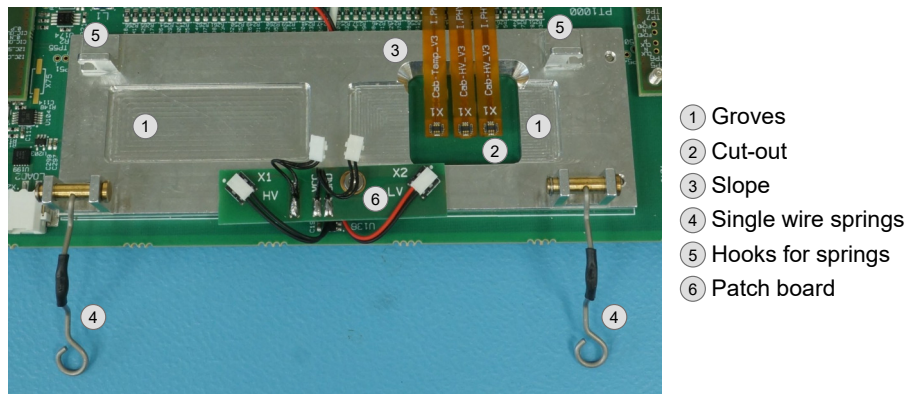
Picture of the Service Hybrid fixture on the test card. The most important components are labeled.
